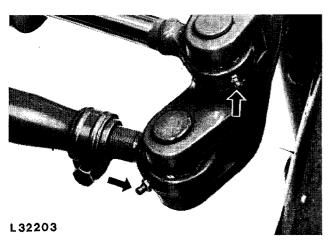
Piston Rod and Tie Rod Grease Fittings (Tractors with Hydrostatic Steering)
